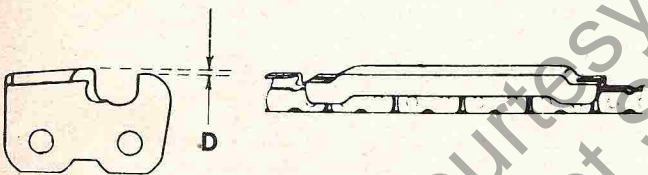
Depth gauge distance (D) determines the size of chip that the tooth takes. At right, a pre-set type depth gauge jointer.
